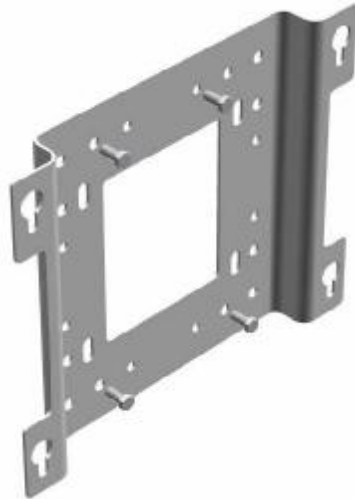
Install the mounting plate on a wall using normal plugs and screws. Use existing holes in the mounting plate, or drill new ones as required.
